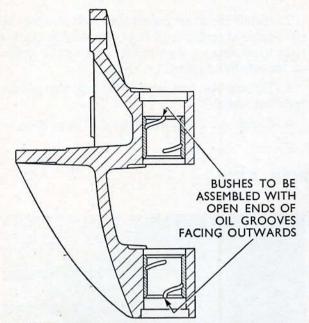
Sectioned view of relay and connecting rod lever housing, showing assembled position of bushes
